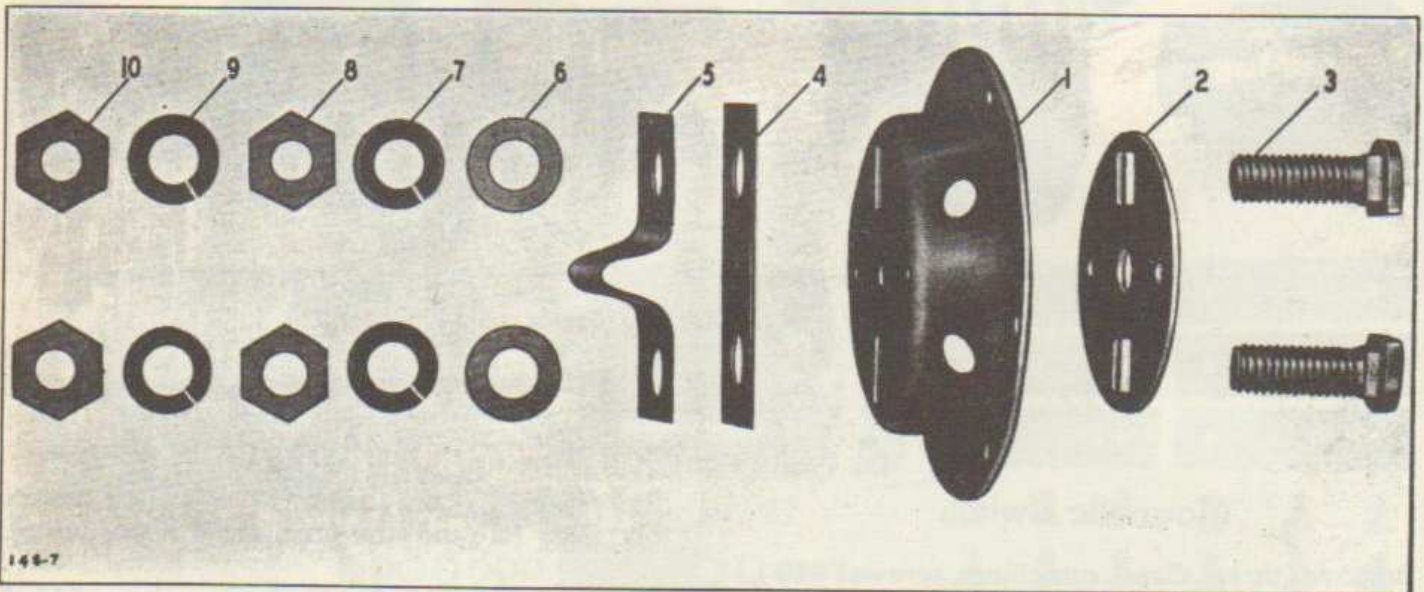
Exploded View of Magnetic Switch Base and Terminal Assembly
